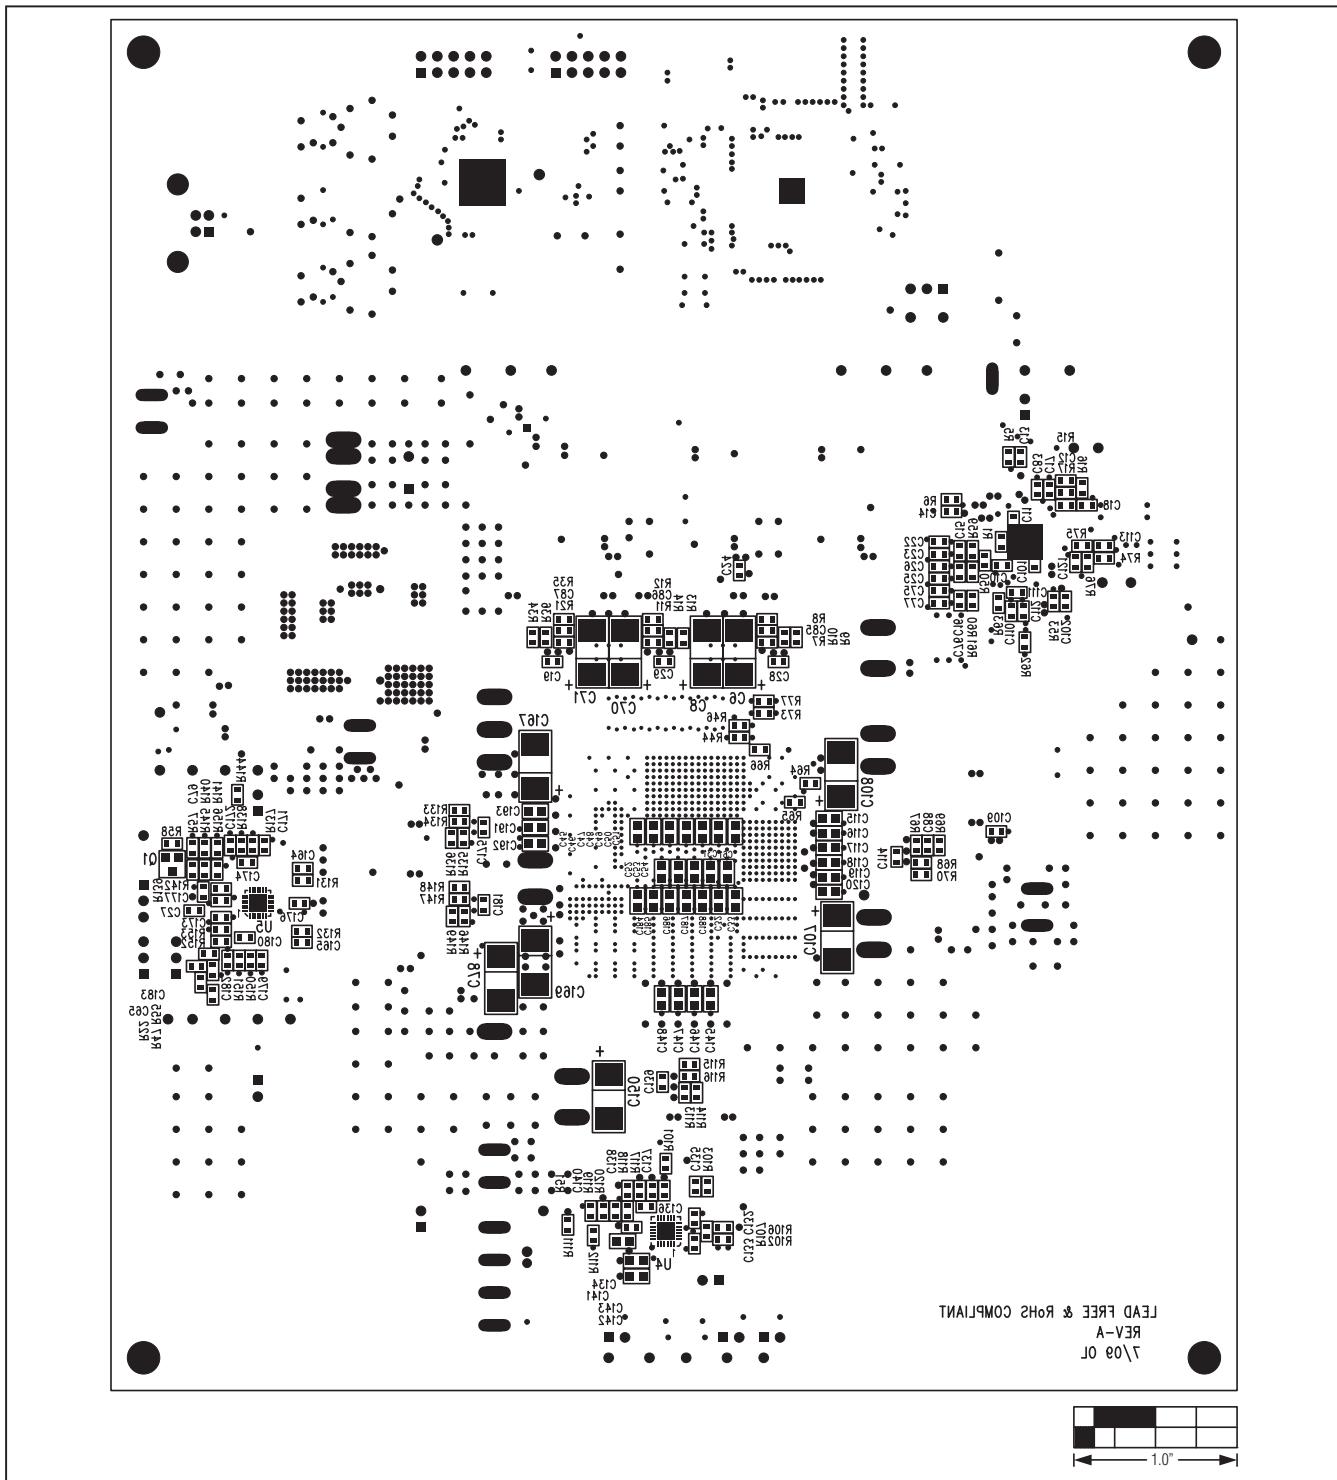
MAX17039 EV Kit Component Placement Guide—Solder Side
